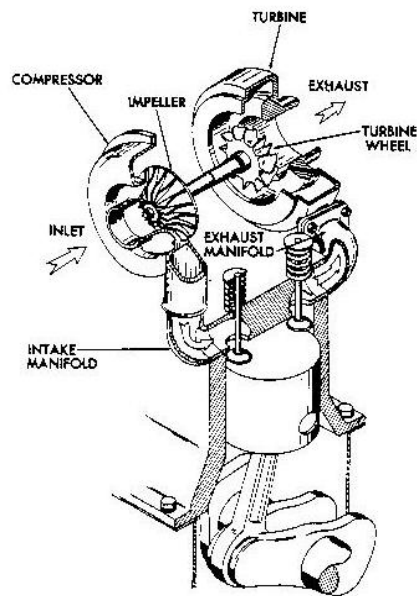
Simplified drawing of turbocharger and engine cylinder. (Retrieved from Hugh MacInnes' *Turbochargers*, courtesy of Schwitzer)
